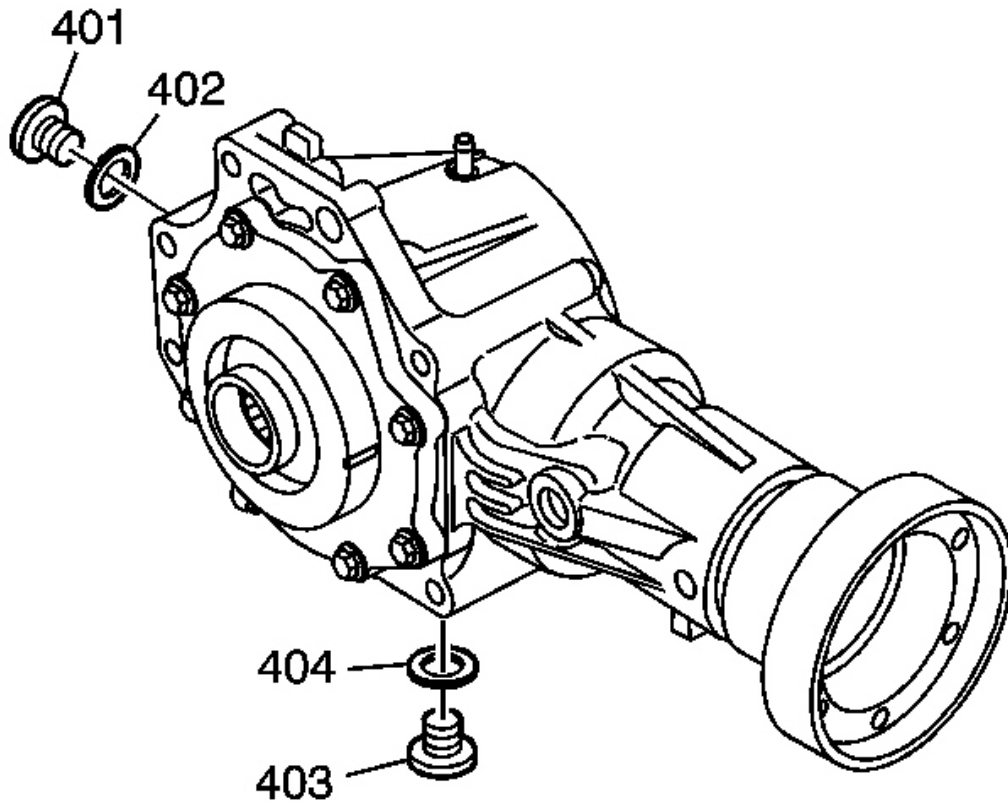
Removing/Installing Fill Plug, Washer, Drain Plug & Washer
